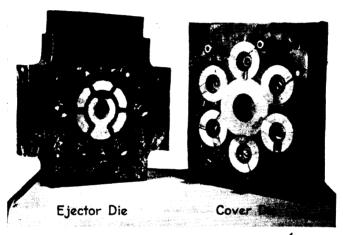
A die-casting die is made of two blocks of steel into which the impression of the part is machined or hobbed. The two halves are held in alignment by dowels when the machine is closed to make the shot. Shown is a multiple-impression die for easting six parts simultaneously.
